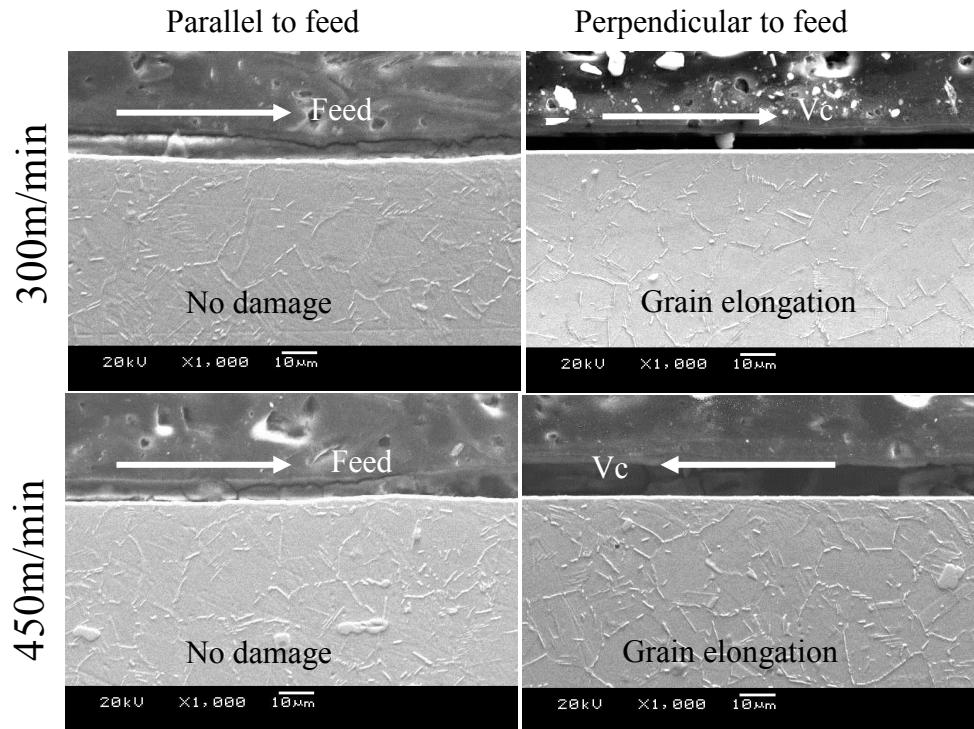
Cross-sectional SEM images of machined workpiece sub-surface produced with worn uncoated tools at cutting speeds of 300 and 450 m/min
